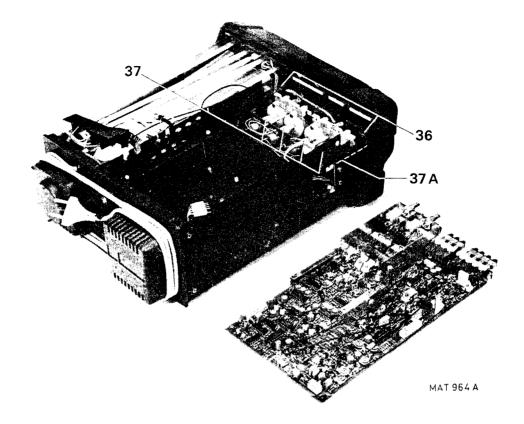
Internal view with pre-amplifier and trigger unit removed
